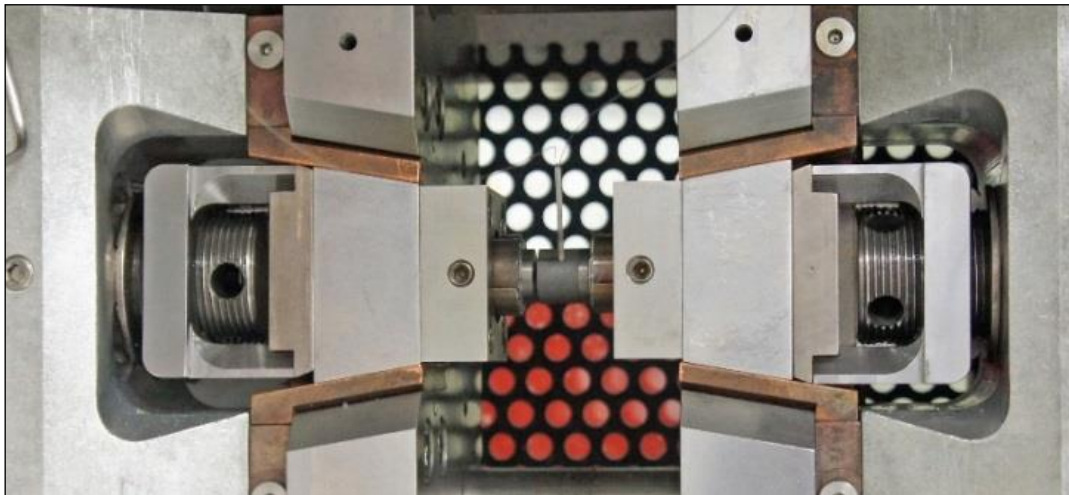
THE DIE SET INSIDE THE GLEEBLE MACHINE 3800
